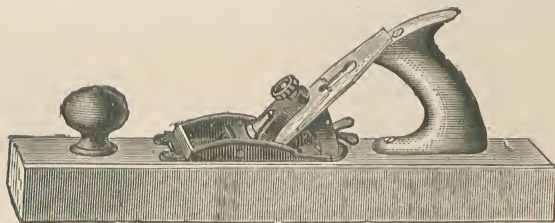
STANLEY'S WOOD JACK-PLANE.
